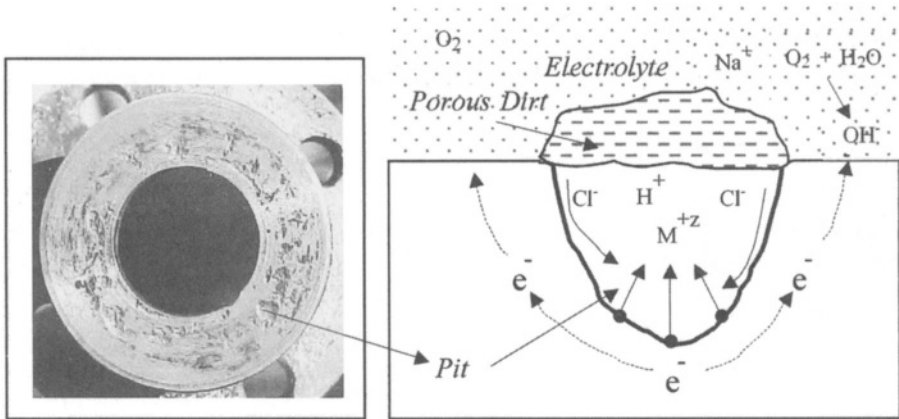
Crevice corrosion. a) Stainless steel flange and b) mechanism [5].
